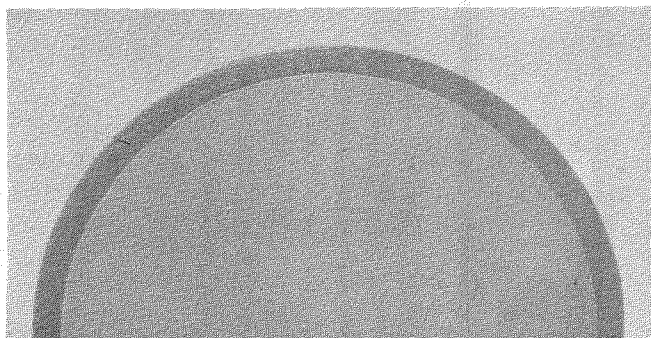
Core-to-clad interface in the coextruded rod. Extrusion billet cores from a 2-3/8 inch diameter casting made in an eight-cavity mold; heat treated for 30 minutes at 780°C and air cooled.
